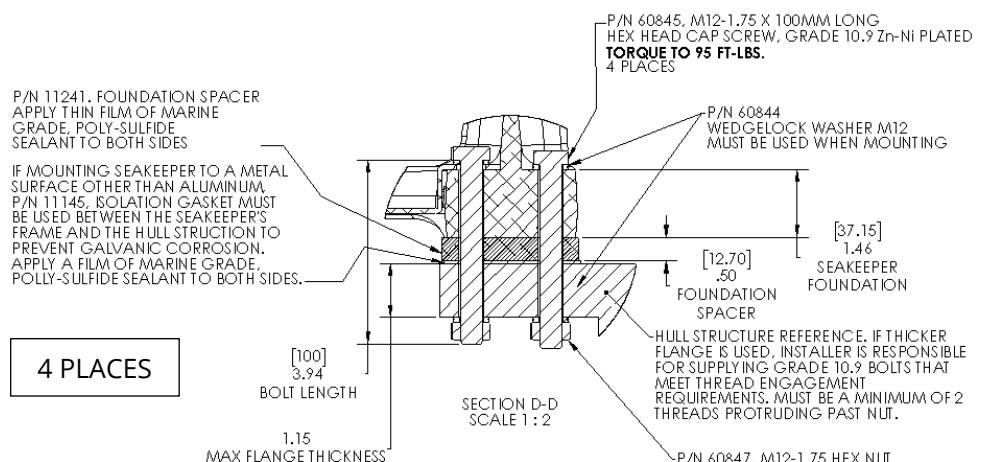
Seakeeper 5-6 Bolt-In Installation Guide
